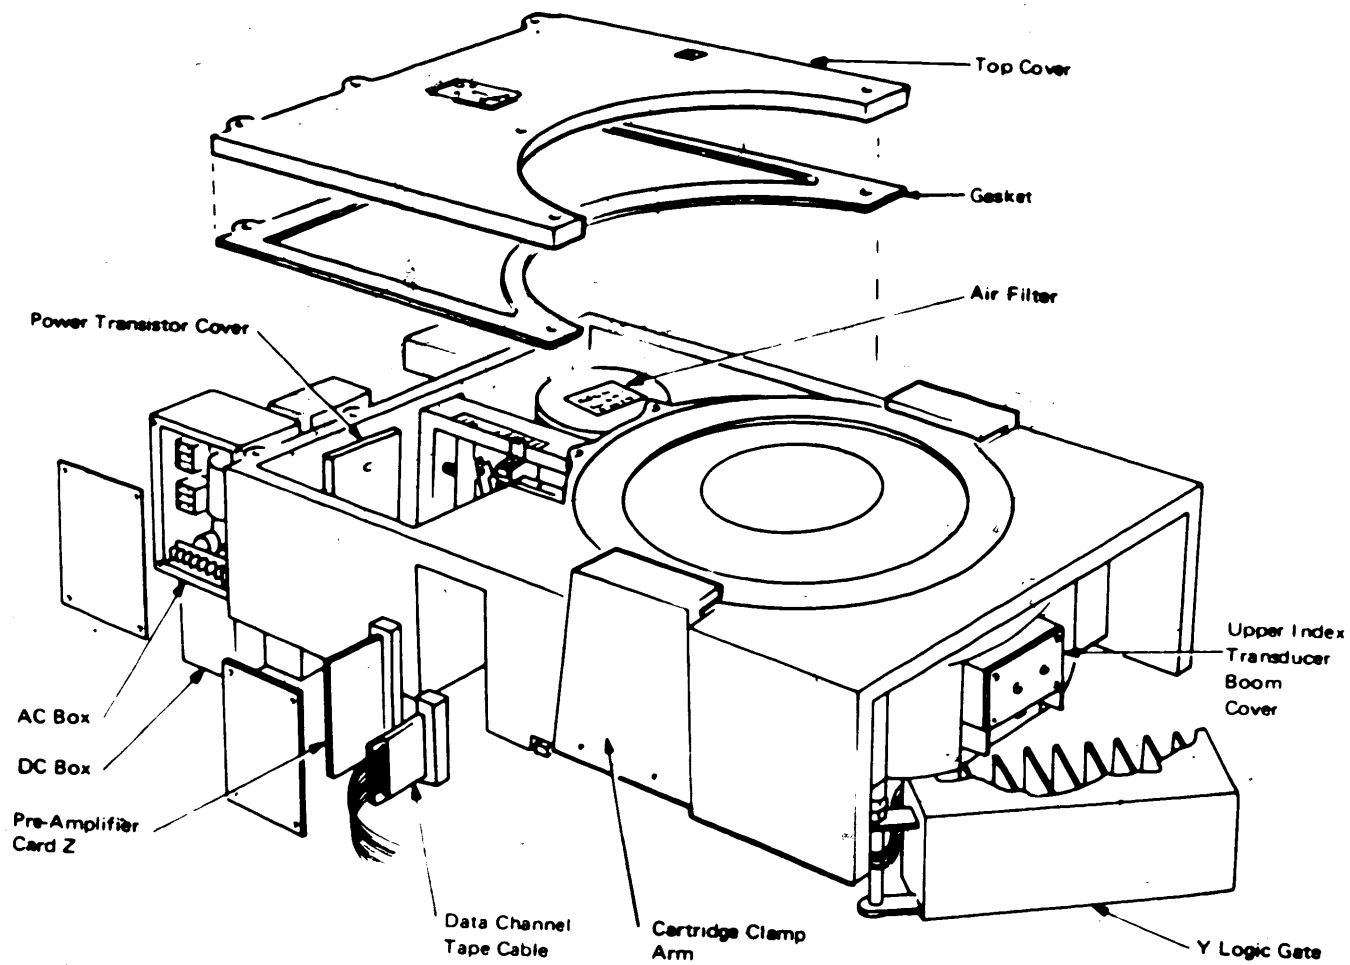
Front Top View of 5444 - Locations [07566A]
